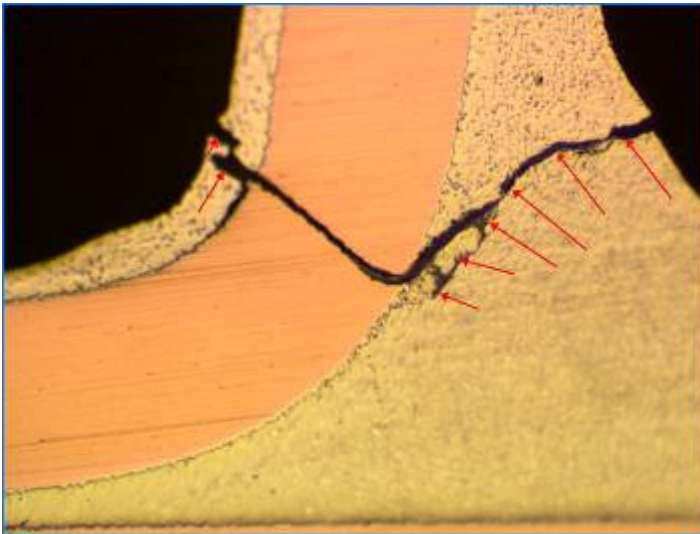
cross section, SN63, U20, left lead and solder crack and void, 200xa
